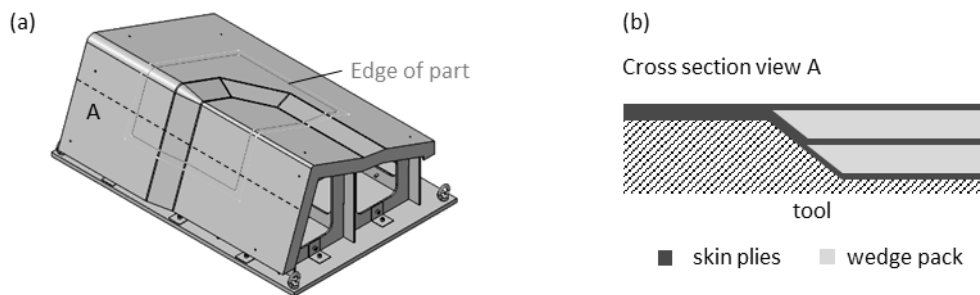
Laminate design of the demonstrator preform, tool with edge of part (a) and the cross section of the part showing the wedge pack design in cross section view A (b)
